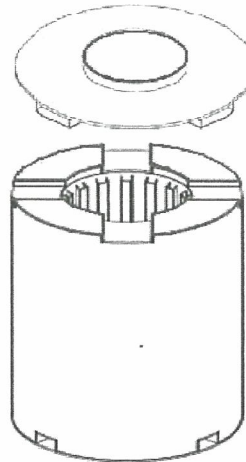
Welding Portion at Body and Lid of Cask.
